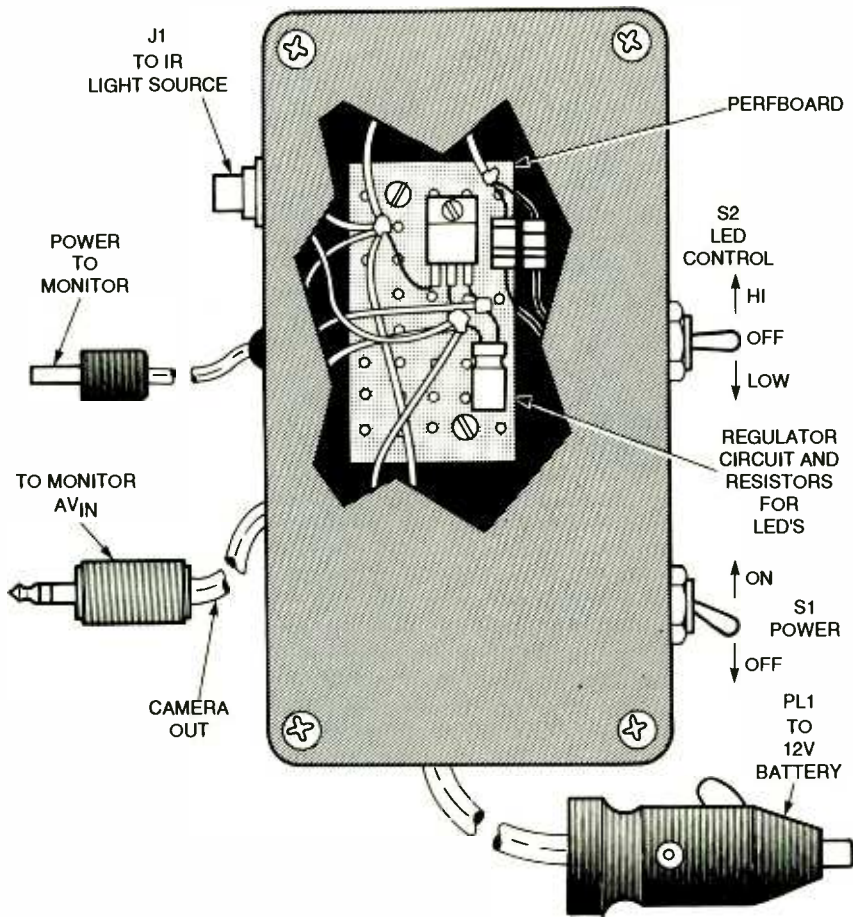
Two holes are drilled through the perfboard and both cabinets and then outfitted with appropriate screws and nuts to hold the entire assembly in place.
